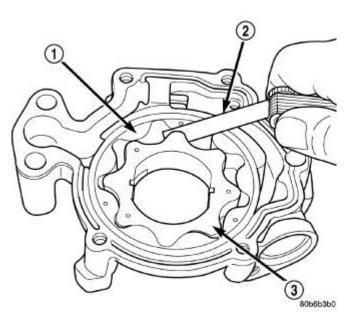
Measuring Outer Rotor Clearance in Housing Courtesy of CHRYSLER LLC
